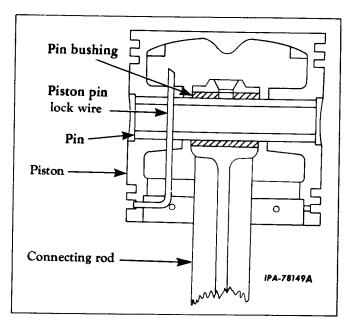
Method of Installing Wrist Pin Lock Wire.
